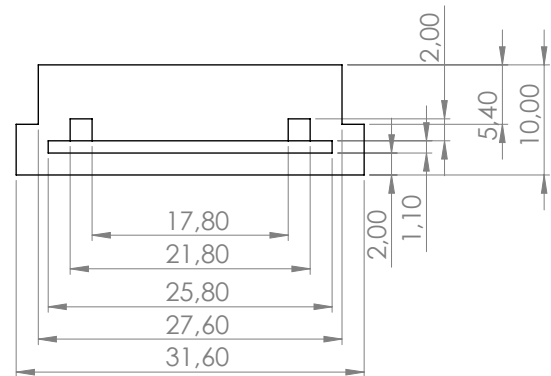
Magnetometer holder side plate, front view. Dimension of 2 mm indent not visible.
